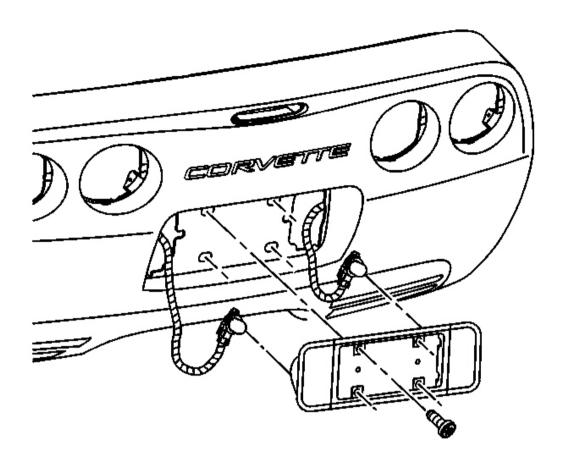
Backup Lamp Assembly To Vehicle Courtesy of GENERAL MOTORS CORP.
